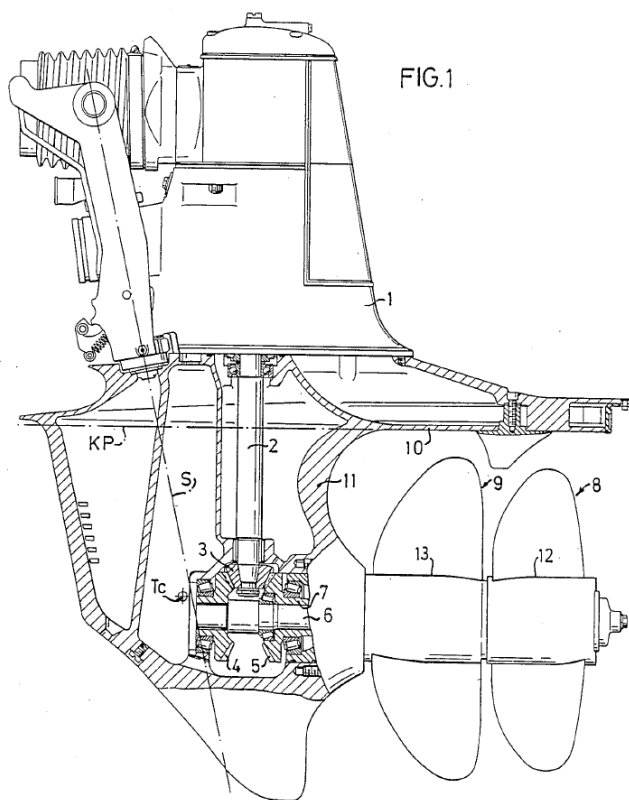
is a side view “in partial section of a double propeller drive unit.” Ex. 1005, 2:55–56. The depicted drive unit includes housing 1, propeller shaft 6 carrying propeller 8, and propeller shaft 7 carrying propeller 9. *See id.* at 2:59–63, 2:68–3:1. Brandt discloses gears 3, 4, 5 that allow output shaft 2 to drive propeller shafts 6, 7 (and thus, propellers 8, 9) in opposite directions. *See id.* at 2:62–3:5. Housing 1 pivots about steering axis S. *See id.* at 3:6–8.
